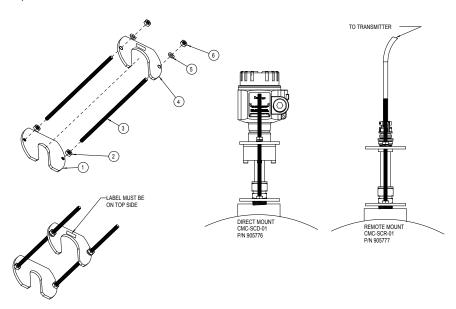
CorrTran MV Safety Bracket Assembly and Installation
